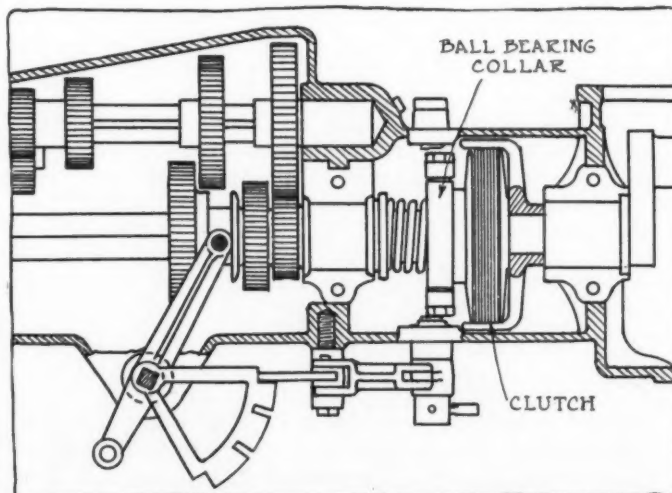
Layout of 1909 Maxwell gearset and clutch members
